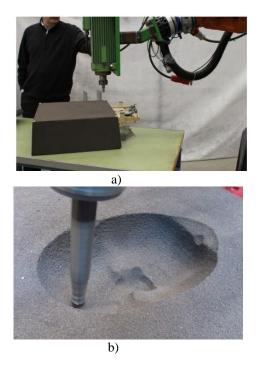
Robot starting the mould milling (a) and resulting mould shape (b).
